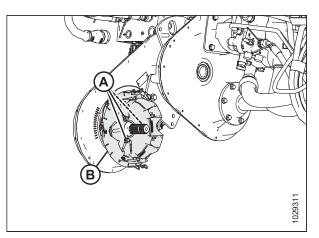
Completion Gearbox Chain Tensioner Cover
